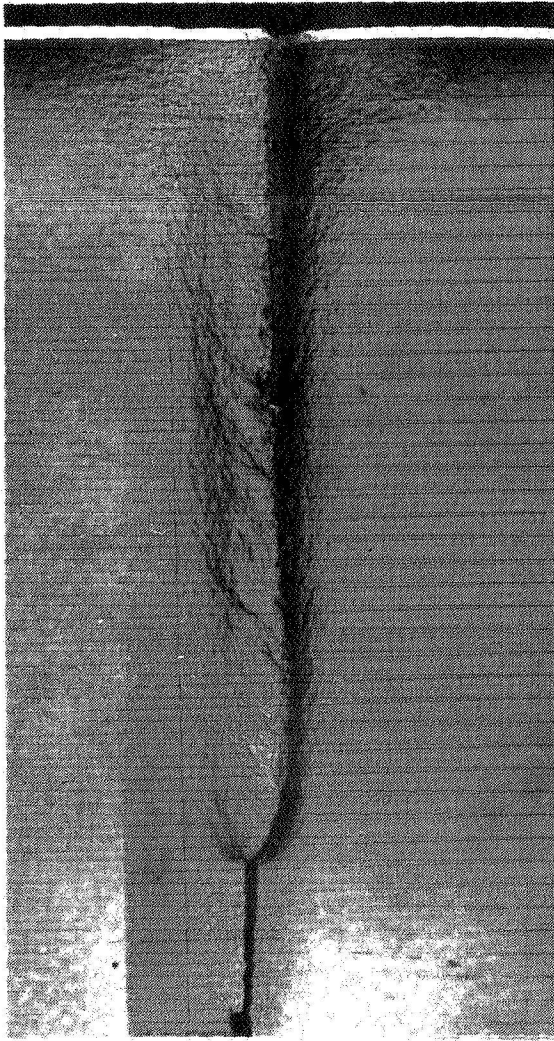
Fracture Appearance, 6061-T6 Aluminum, Specimen AL-1
